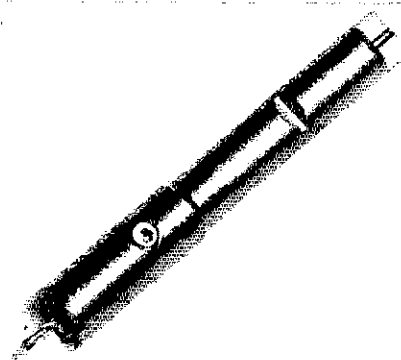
Tool used in isolated-pad construction. Set screw allows removal of the No. 60 center drill. The shank will fit either an ordinary hand drill or certain push-type screwdrivers.
